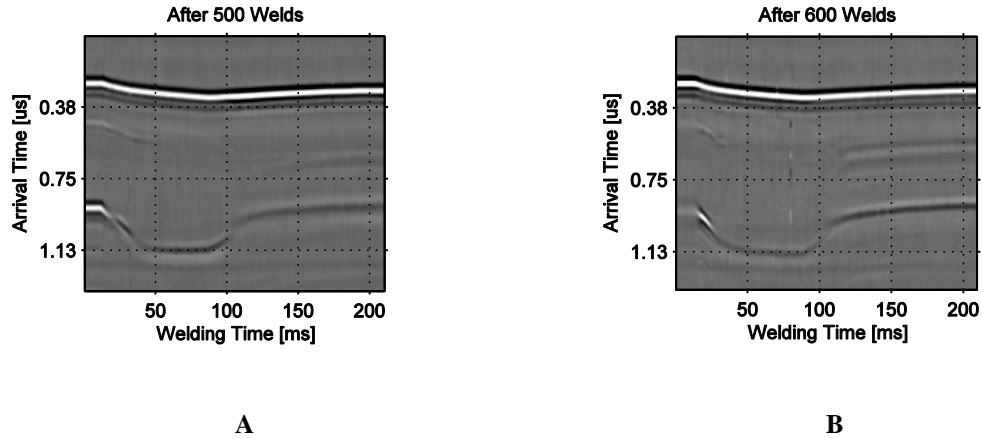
M-Scans acquired from the cathode electrode. A- After 500 Welds. B- After 600 Welds
